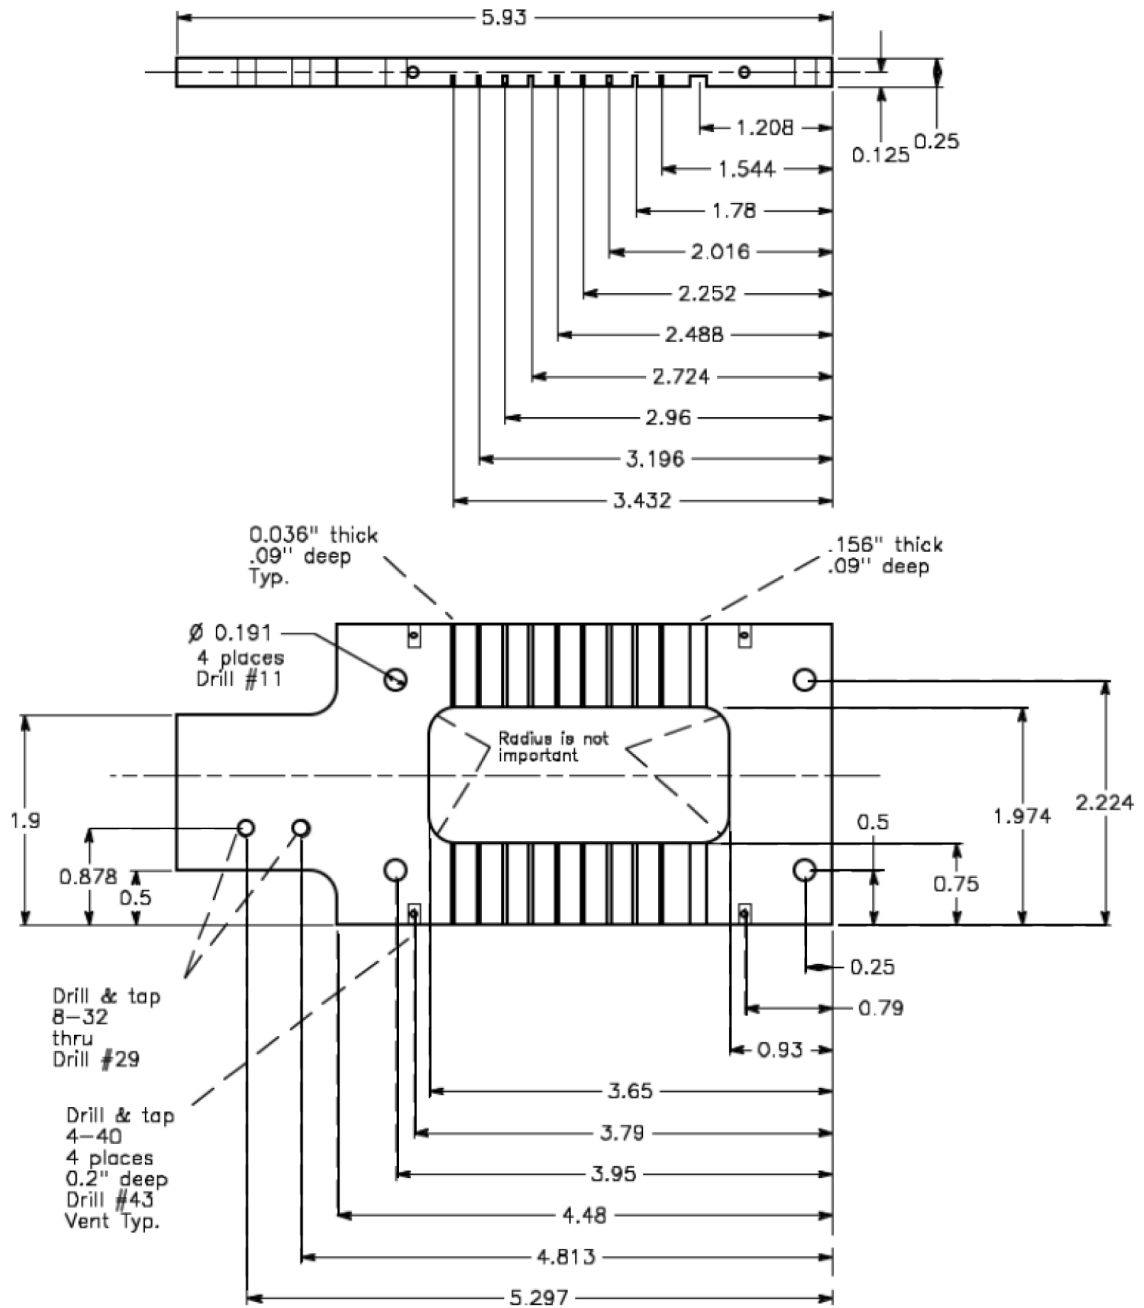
The bottom plate of the lens assembly. The grooves hold the lens plates. The extension to the left is for mounting the detector. The plate material is Teflon™.
